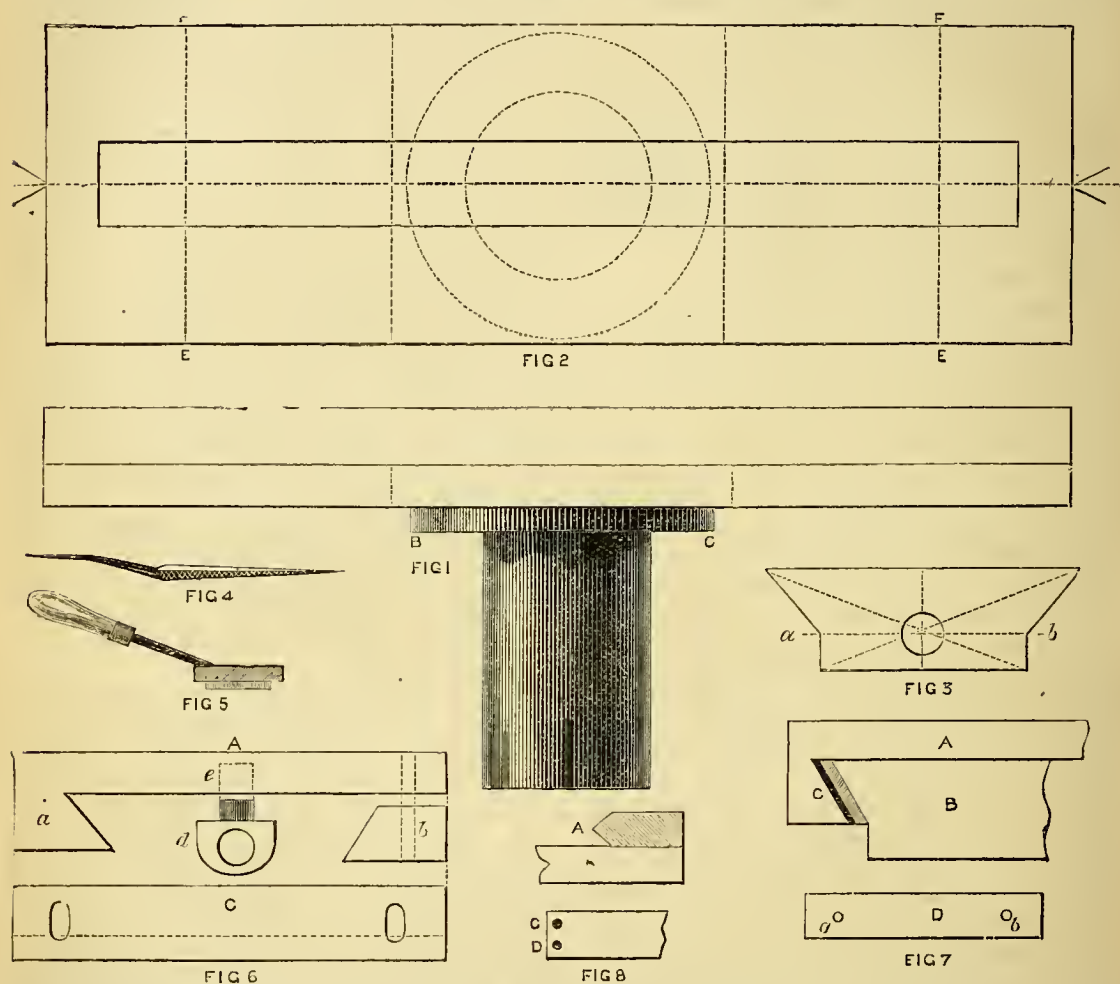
PROFILE OF LOWER FRAME. FIG. 2.—PLAN OF LOWER FRAME. FIG. 3.—END VIEW OF LOWER FRAME. FIG. 4.—FILE WITH BENT TANG. FIG. 5.—SHORT SCRAPER. FIG. 6.—MAN PLATE FORMING FOUNDATION OF REST. FIG. 7.—METHOD OF FITTING GUIDE BARS. FIG. 8.—MODE SUGGESTED FOR FIXING SLIPS.
